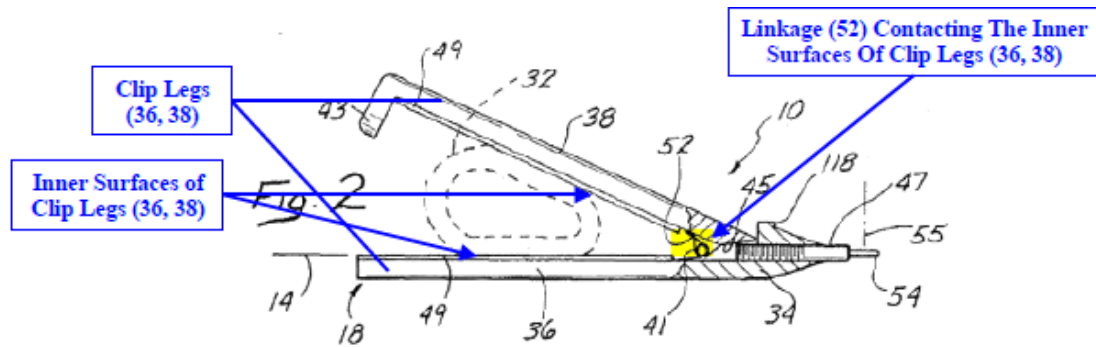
is a sectional view of a clip embodiment including a bowel segment
